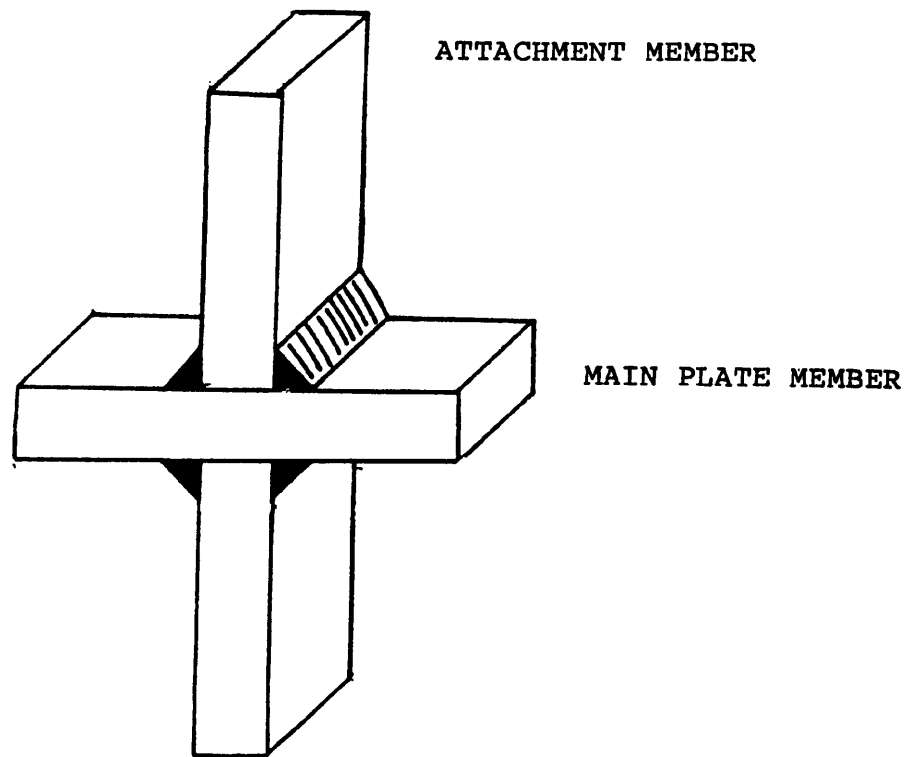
Cruciform Fillet Welded Joint.
